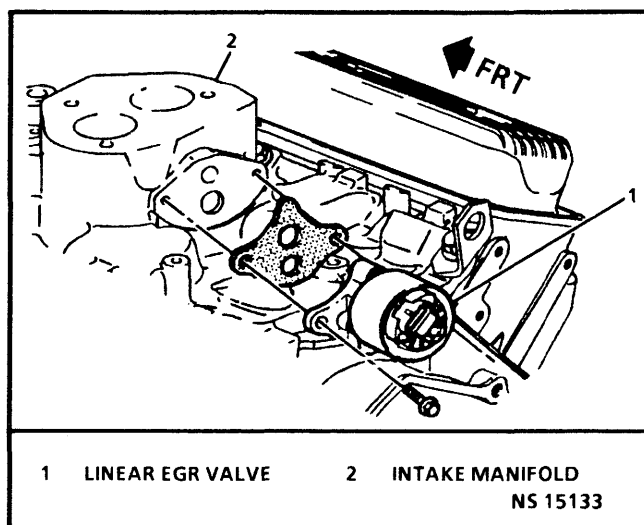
A-4 - Linear EGR Valve Removal - 4.3
